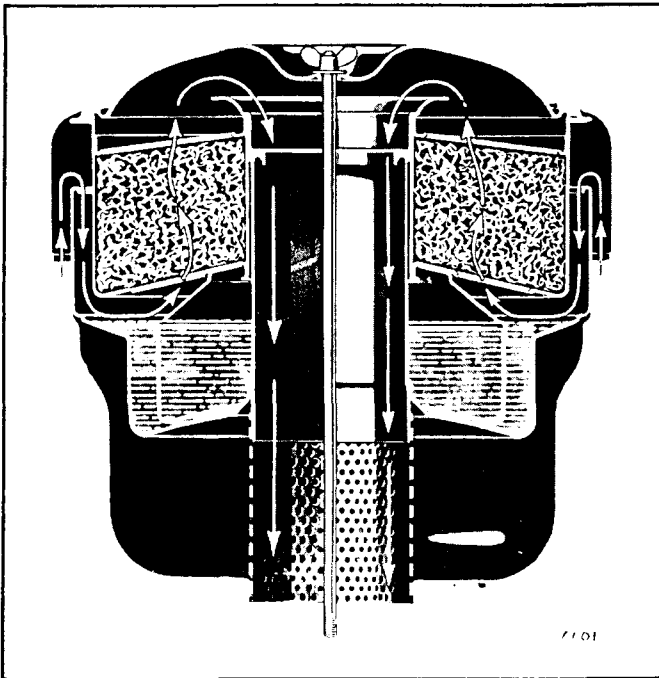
Light-Duty Oil Bath-Type Air Cleaner
